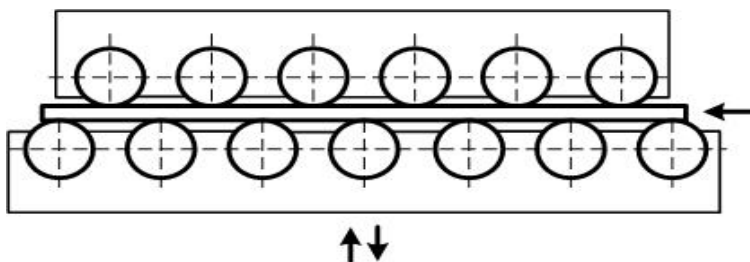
Sheet-straightening machine with parallel arrangement of rollers
